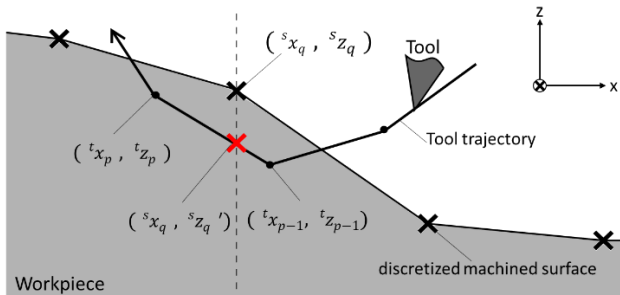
Schematic illustrations of machined surface and cutter trajectory
